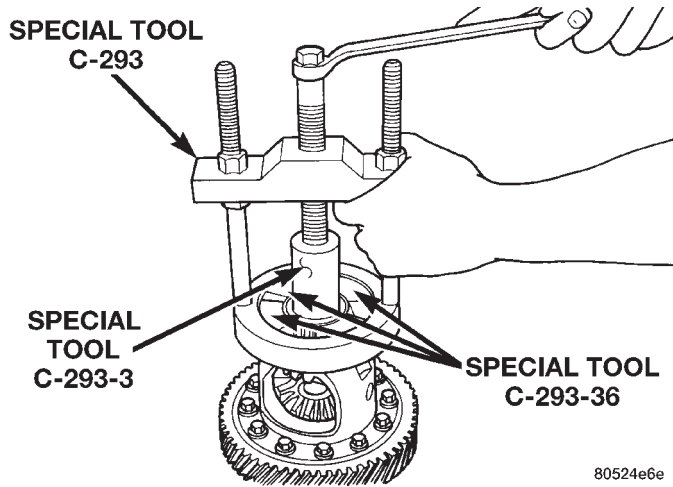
Remove Differential Bearing Cone (Adapter Plate Side)
